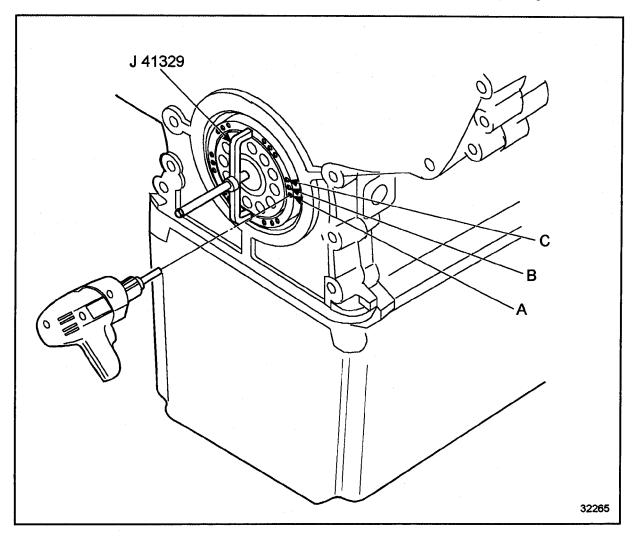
Removing Front Crankshaft Oil Seal from Gear Case Cover
